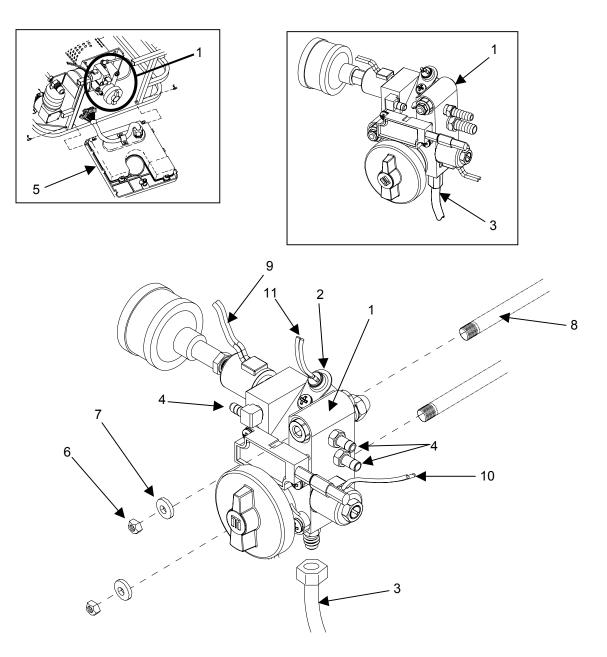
Remove/Install the Fuel Delivery Block from Burner Tube Mounting Studs
